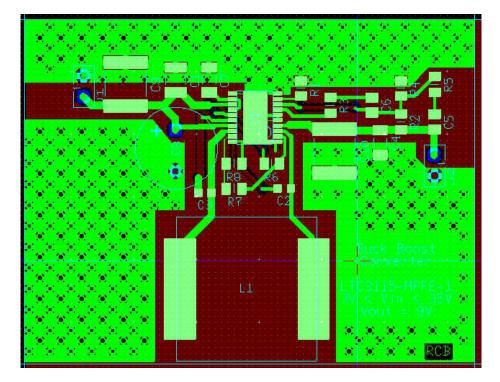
Revised DC converter PCB showing a single converter. The ground plane is shown as the dark red color to show how it would cover the entire underside of the PCB.
